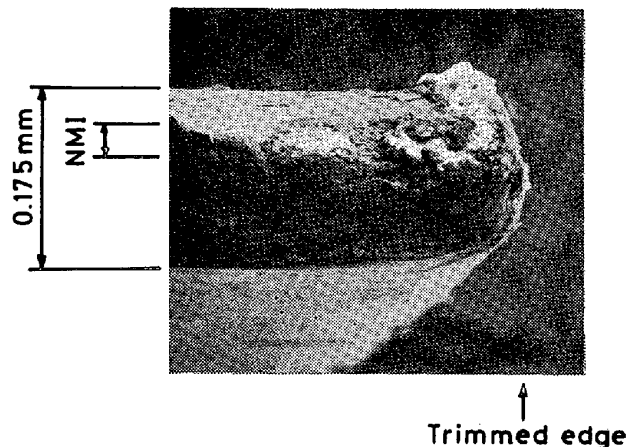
Micro-structure of the flange crack by S. E. M.
